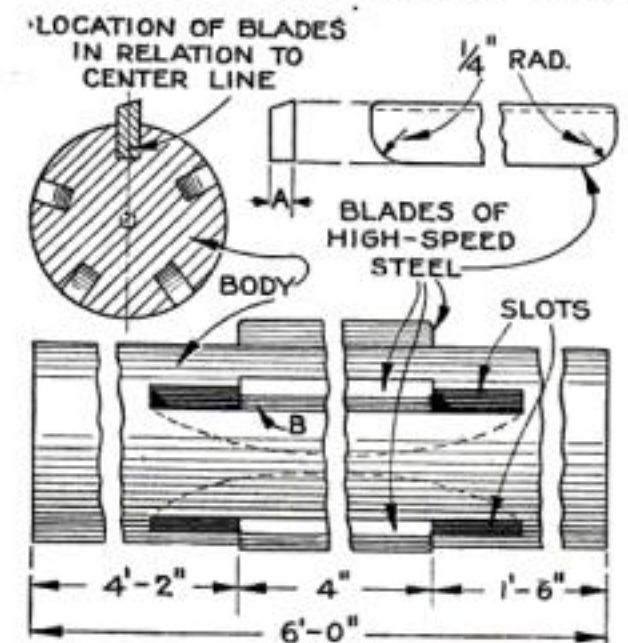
Details of the line reamer illustrated in Fig. 1. Grind A .002 in. oversize, drive the blades in slots milled with a 3-in. slitting saw, and solder the blades slightly at the edges B.
